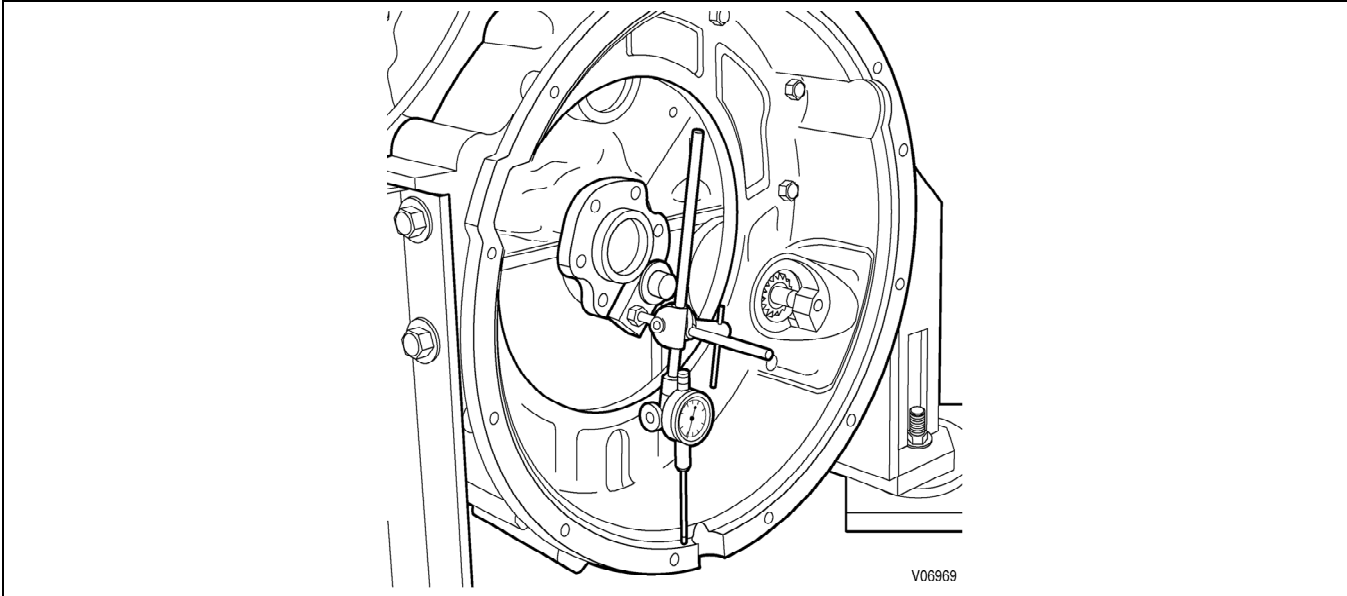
Measuring Flywheel Housing Bore Eccentricity Of The Flywheel Housing Bore
